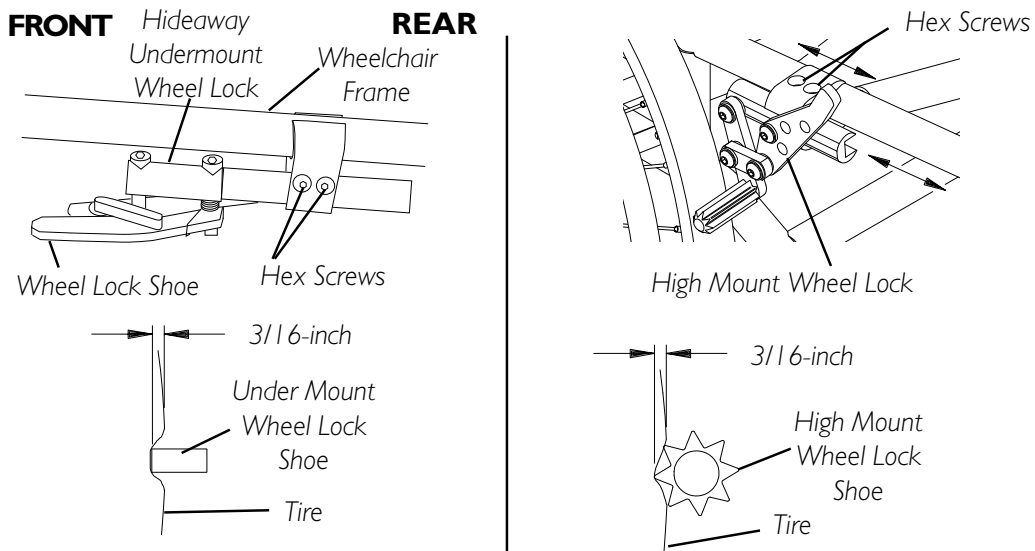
WHEEL LOCK ADJUSTMENT/REPLACEMENT
